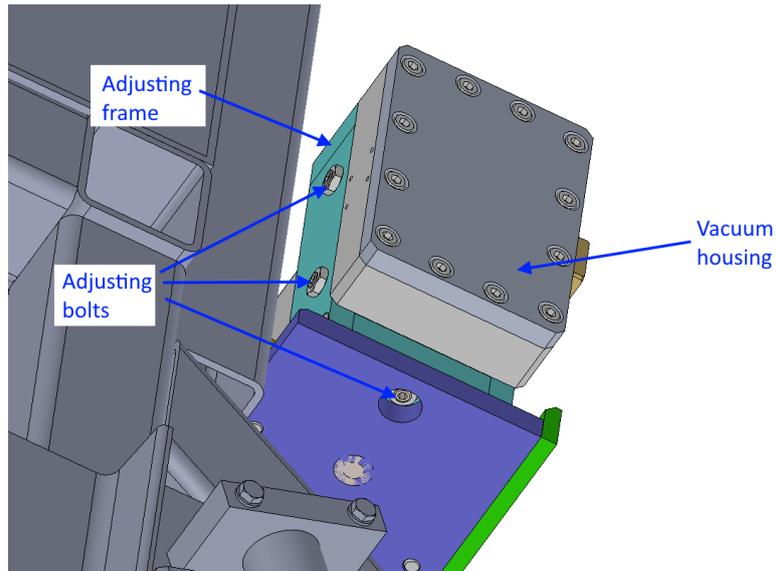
Bottom view of the safety shutter guide's vacuum housing showing the adjusting bolts
